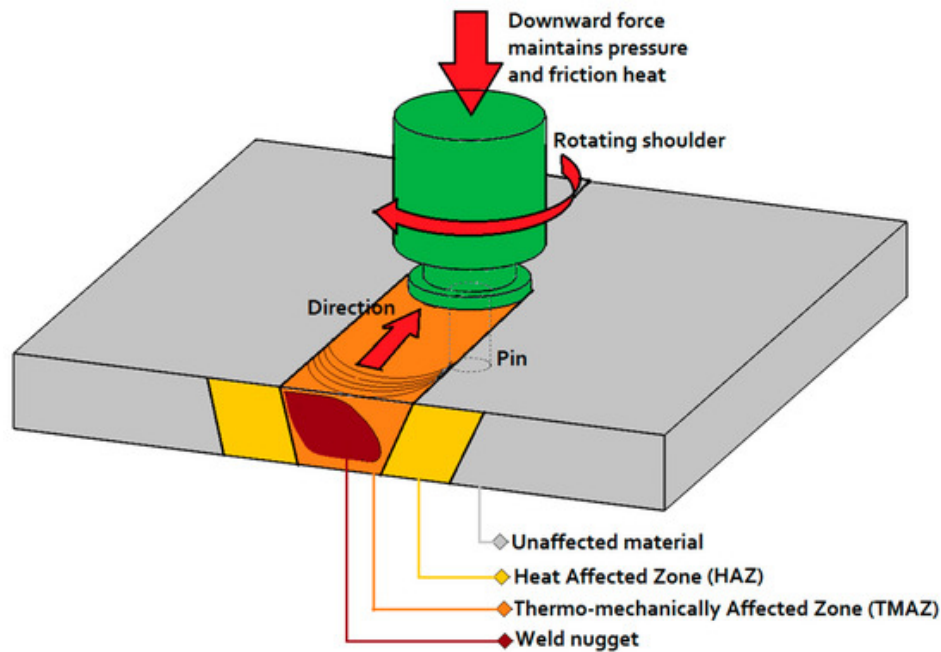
Schematic illustration of the Friction Stir Welding (FSW) process, highlighting the rotating tool components and the characteristic microstructural zones (HAZ, TMAZ, and Weld Nugget). Reproduced from [17].
